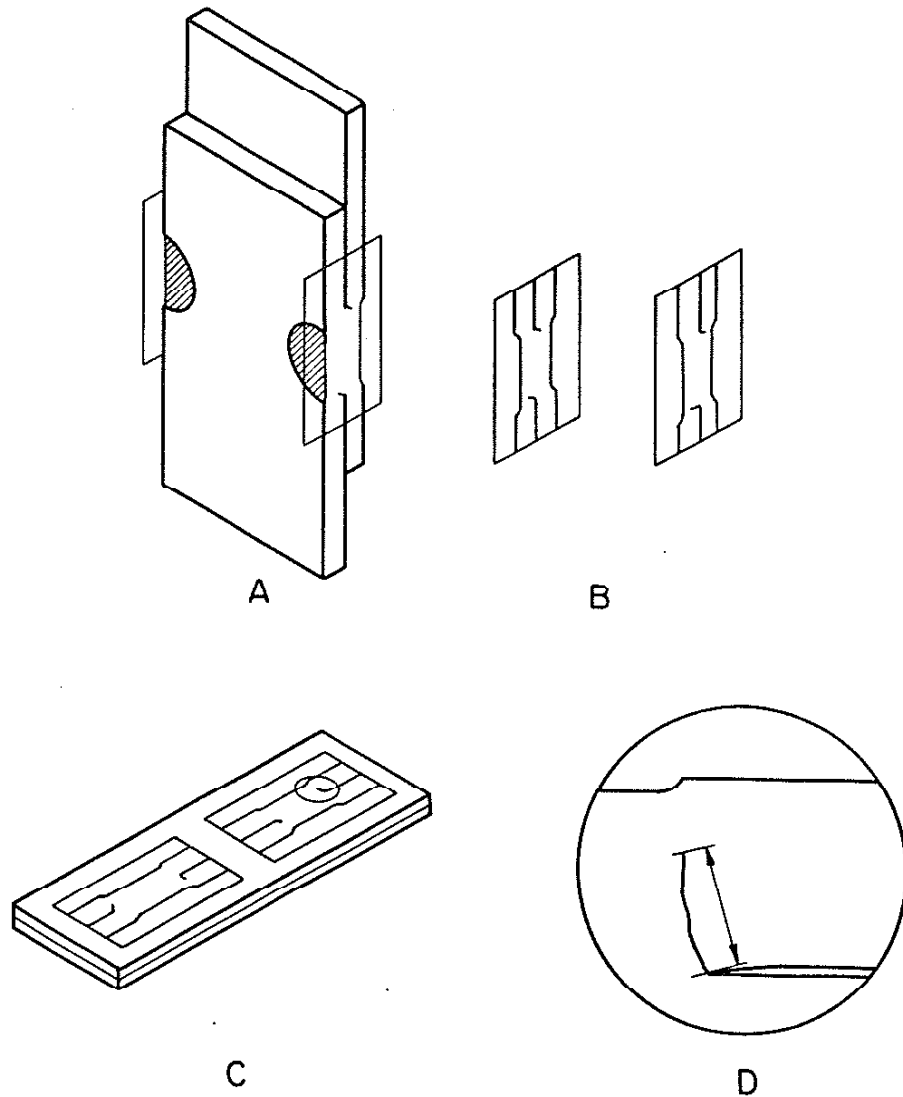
Schematic of the Presectioned-Specimen Method of Monitoring Fatigue Cracks in Spot Weldments. A: Replicas are made of the exposed surfaces. B: Replicas can be removed while the specimen remains gripped in the fatigue testing machine. C: The replicas are placed between glass microscope slides. D: The replicas of the fatigue cracks are measured under a microscope using a calibrated eyepiece.
